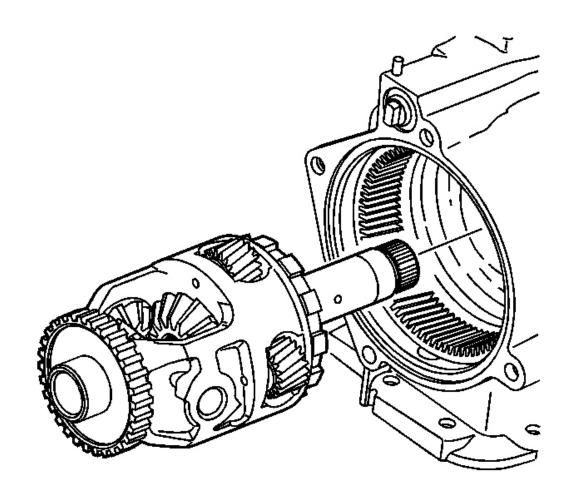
Installing Differential Carrier Courtesy of GENERAL MOTORS CORP.
